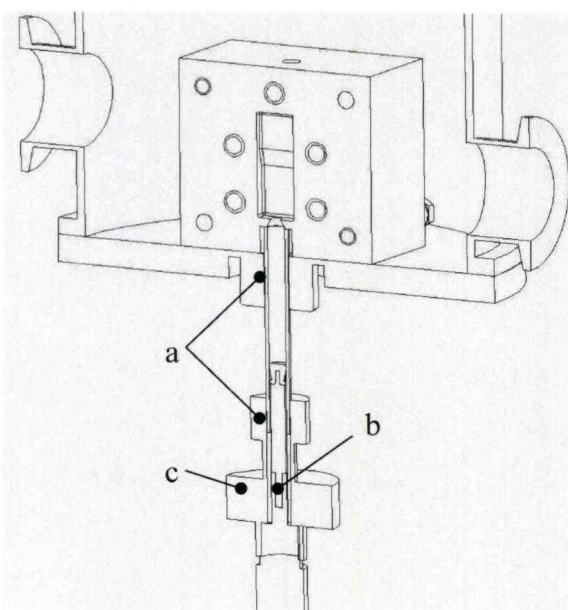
Cross-section of injection system showing vacuum seal locations for the (a) barrel, (b) cylinder rod, and (c) cylinder body.
